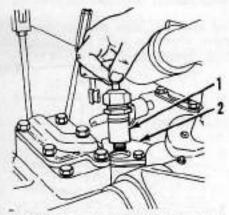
Dump valve (1) and plate (2) must be removed to gain access to bleed points. Refer to paragraph 357 for correct procedure.
